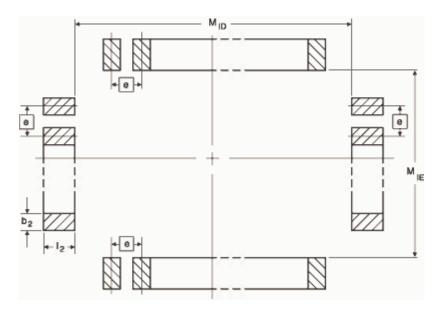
EIA Standard Board Layout of Soldered Pads for QFP Devices
